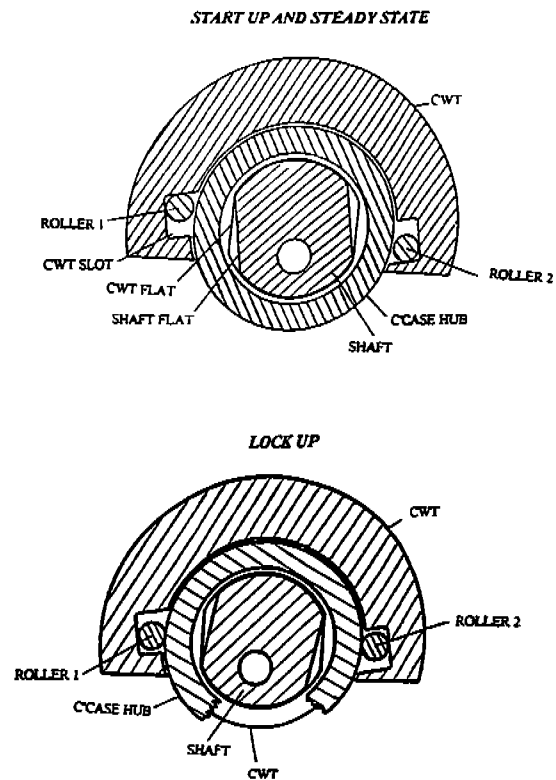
Roller Clutch at Start-up, Steady State and Lock-up Position (Section A-A from Figure 1)
